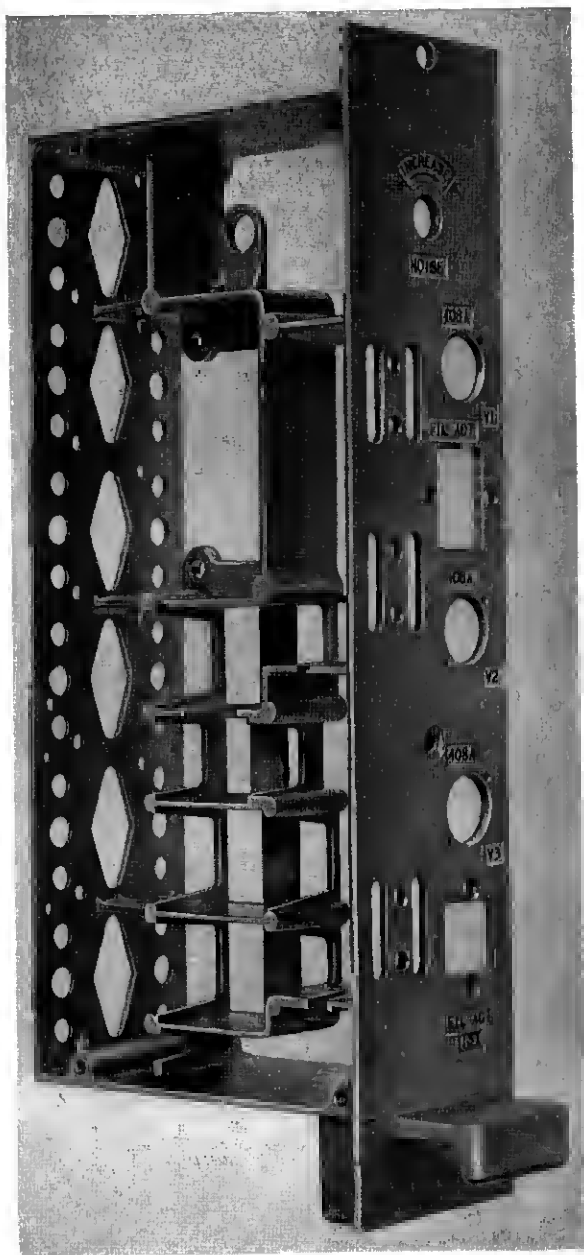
Aluminum alloy die casting for the low group transmitting subassembly. On the front of the casting may be seen the equipment designations. The large number of holes in the rear surface provide clearance for filter terminals as well as filter mounting holes. In the middle portion of the casting are a number of pockets used to hold miniature transformers.
